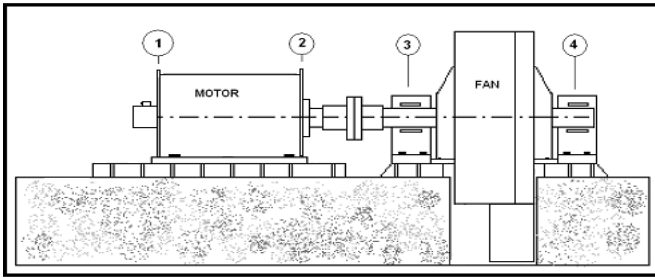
Schematic layout of the blower & motor unit showing the Vibration Measuring Points
